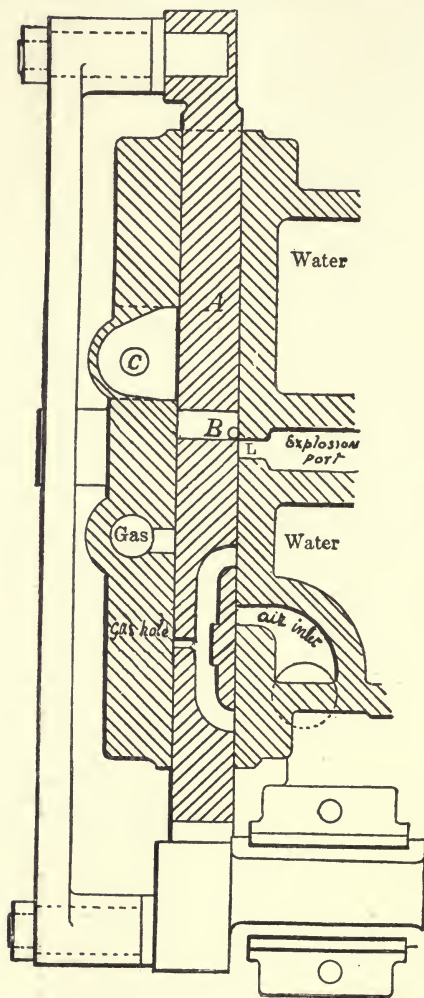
Sectional Plan, Otto Igniting Valve.
